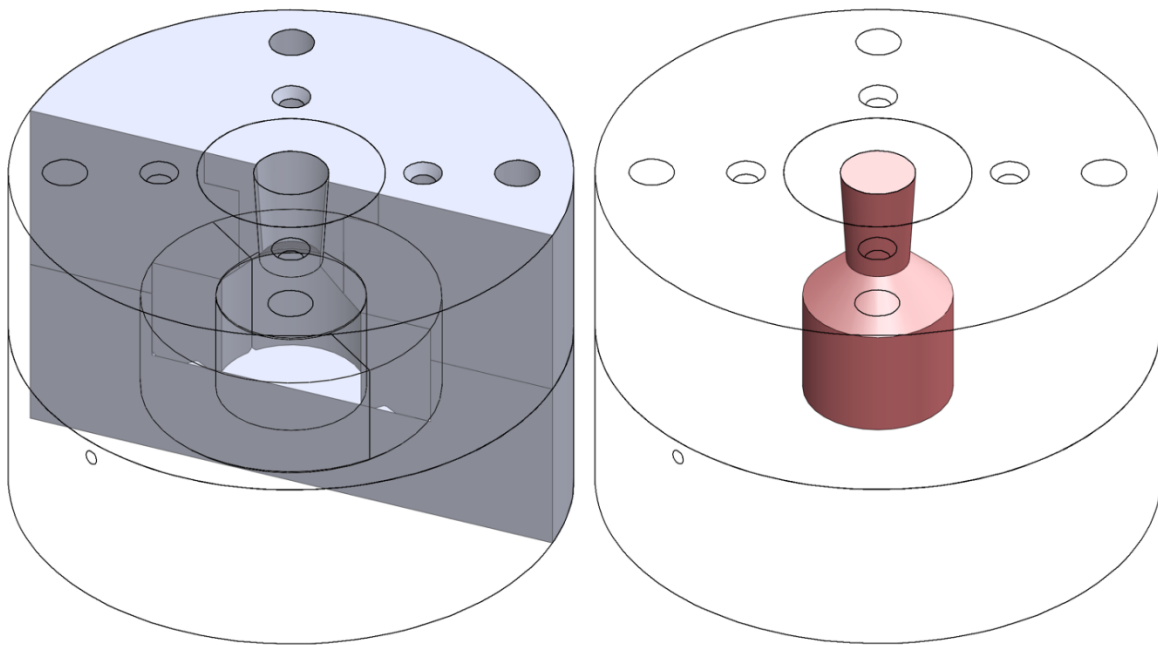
c: Cutaway of freeze-casting mould (left), and visualization of internal mould cavity (right)
